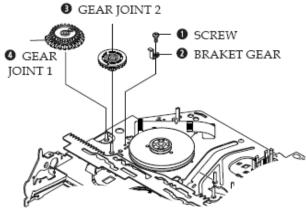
Bracket Gear, Gear Joint 1,2 Removal
